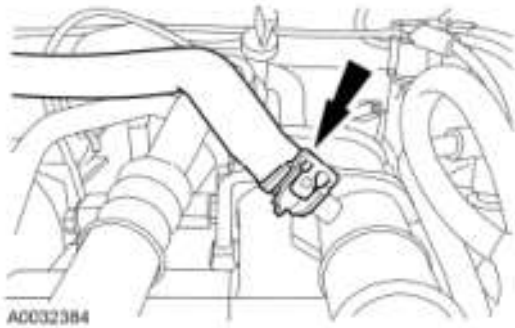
Locating Engine-To-Degas Bottle Coolant Bypass Hose
